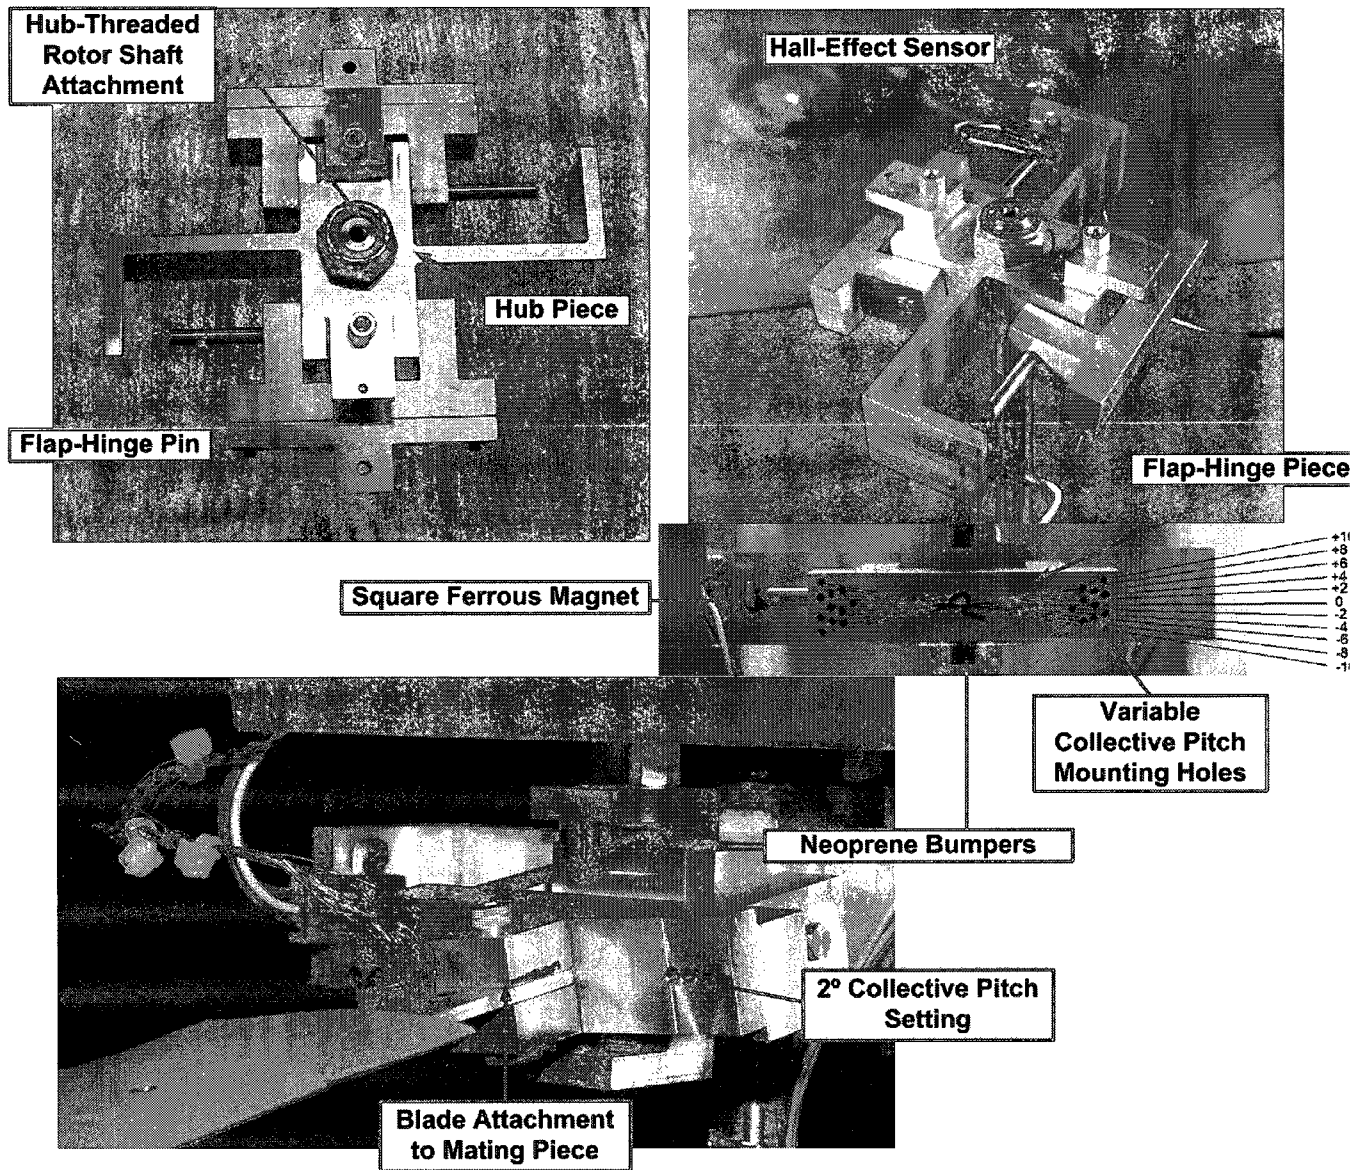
Rotor hub components of the Froude-scaled rotor system.
